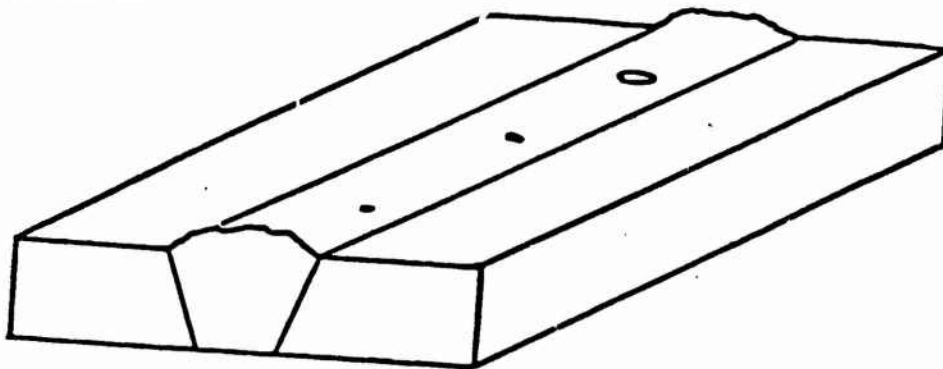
Weld Sample #2 Containing Planar Discontinuities 1/16", 1/8" and 1/4" in Diameter.
